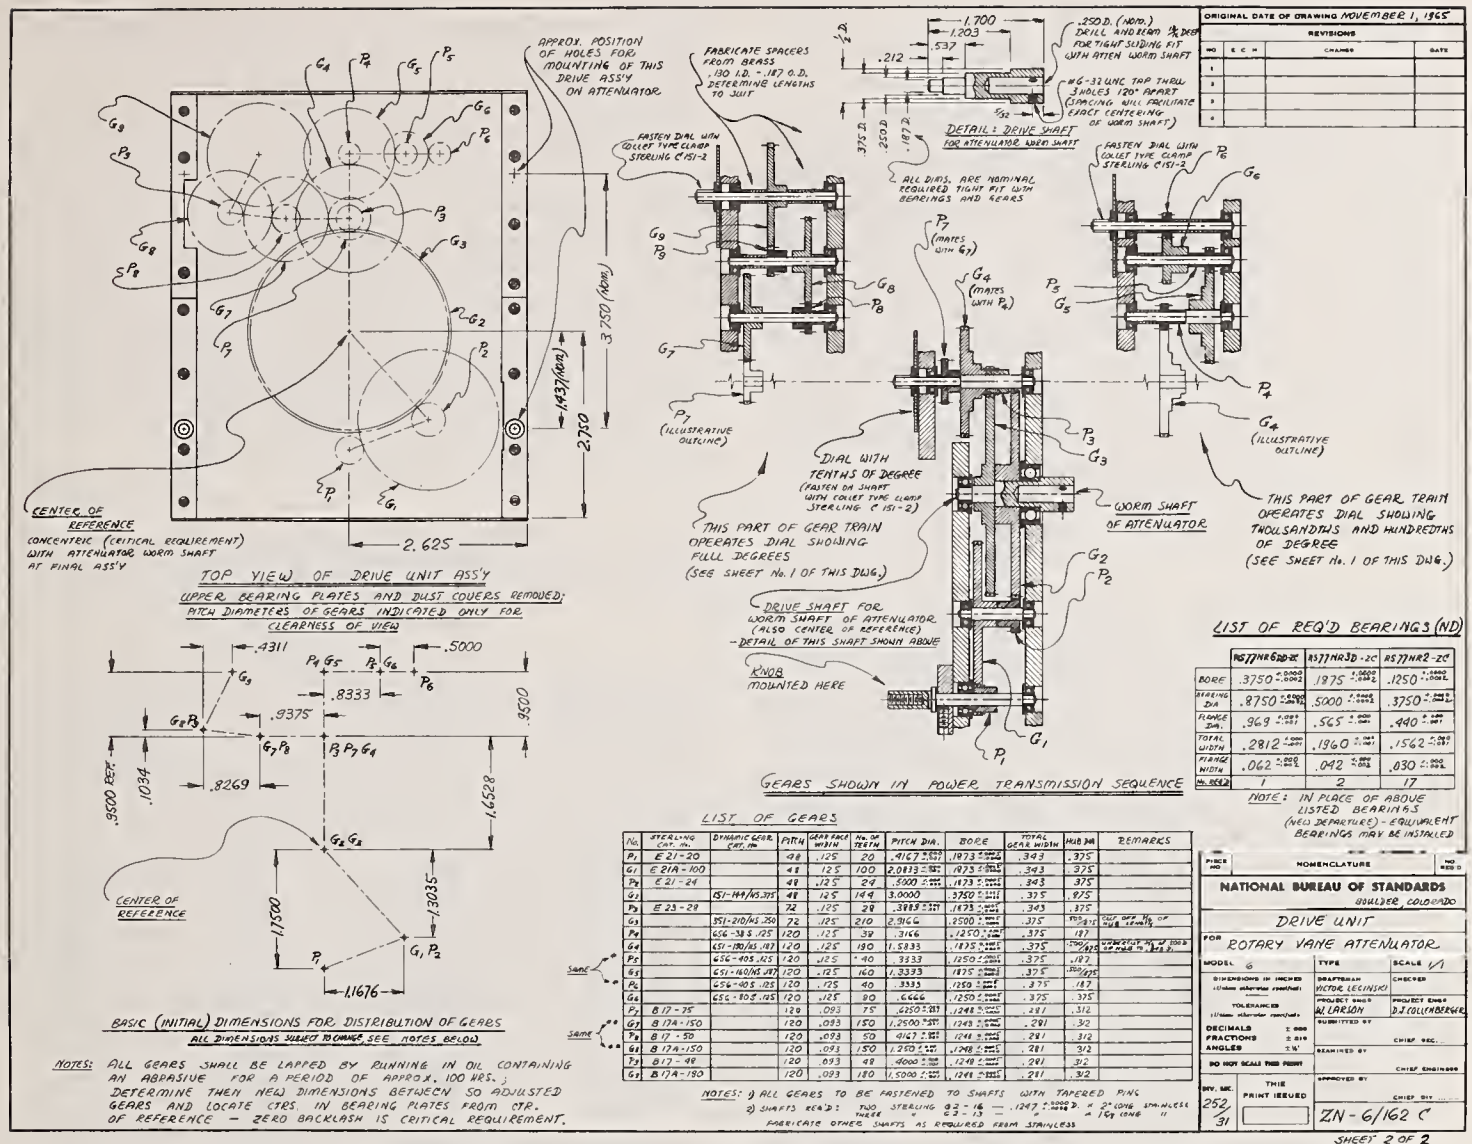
Machine drawing of drive unit gearing for rotary-vane attenuator.
